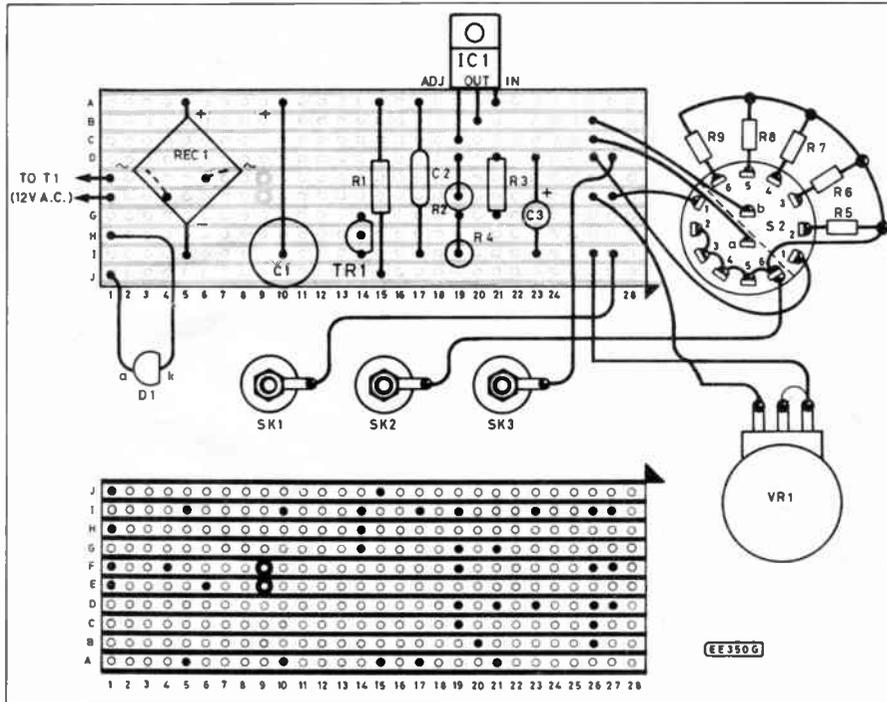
Component layout, details of breaks in copper strips (2 off) and interwiring to the front panel mounted components. The wires from S2 to the stripboard should be kept as short as possible and reasonably thick.
